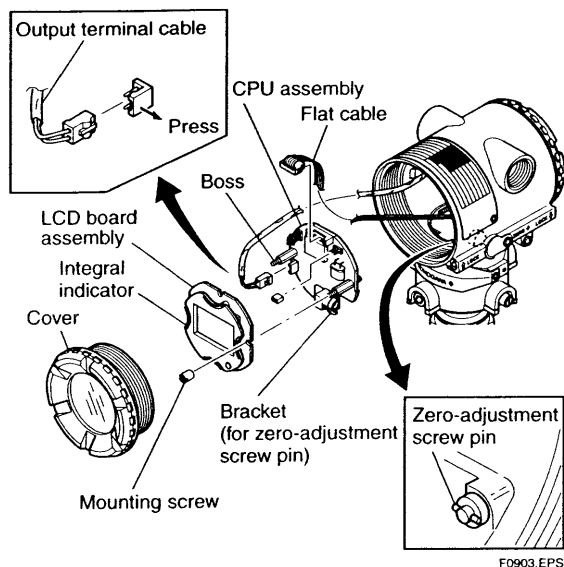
Removing and Attaching LCD Board Assembly and CPU Assembly
